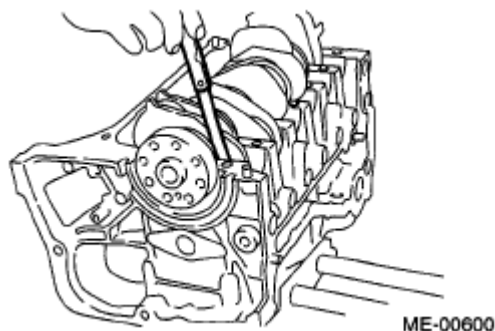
Measuring Thrust Clearance Of Crankshaft
